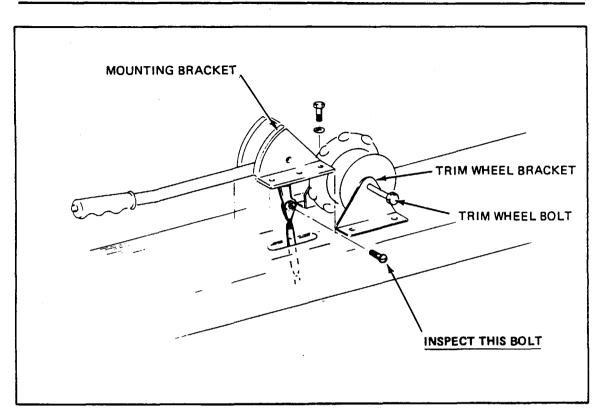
Flap Control Cable Attachment Bolt Inspection.
